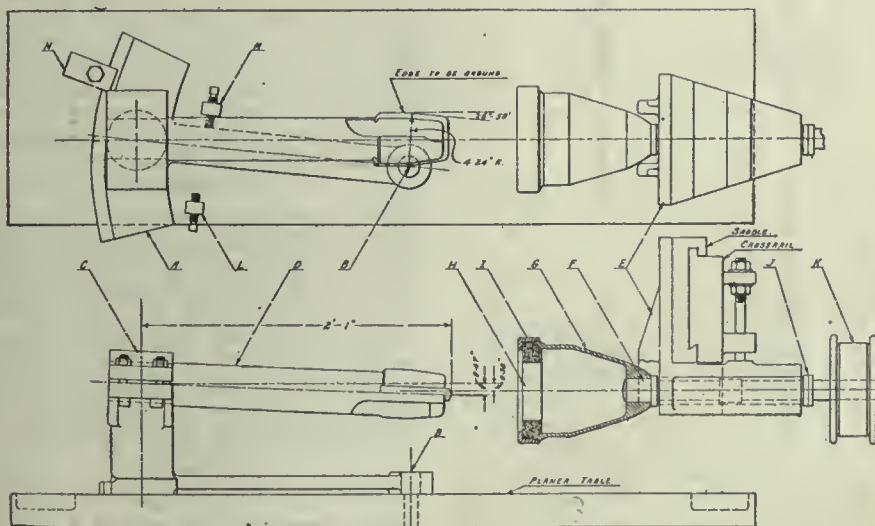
FIXTURE FOR GRINDING CUTTERS.
